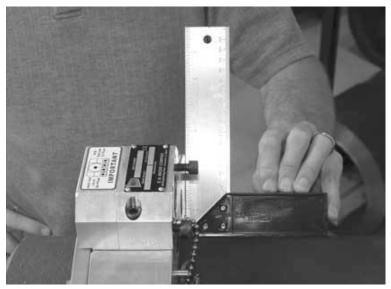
Use the square to make sure the machine is perpendicular to the pipe.
